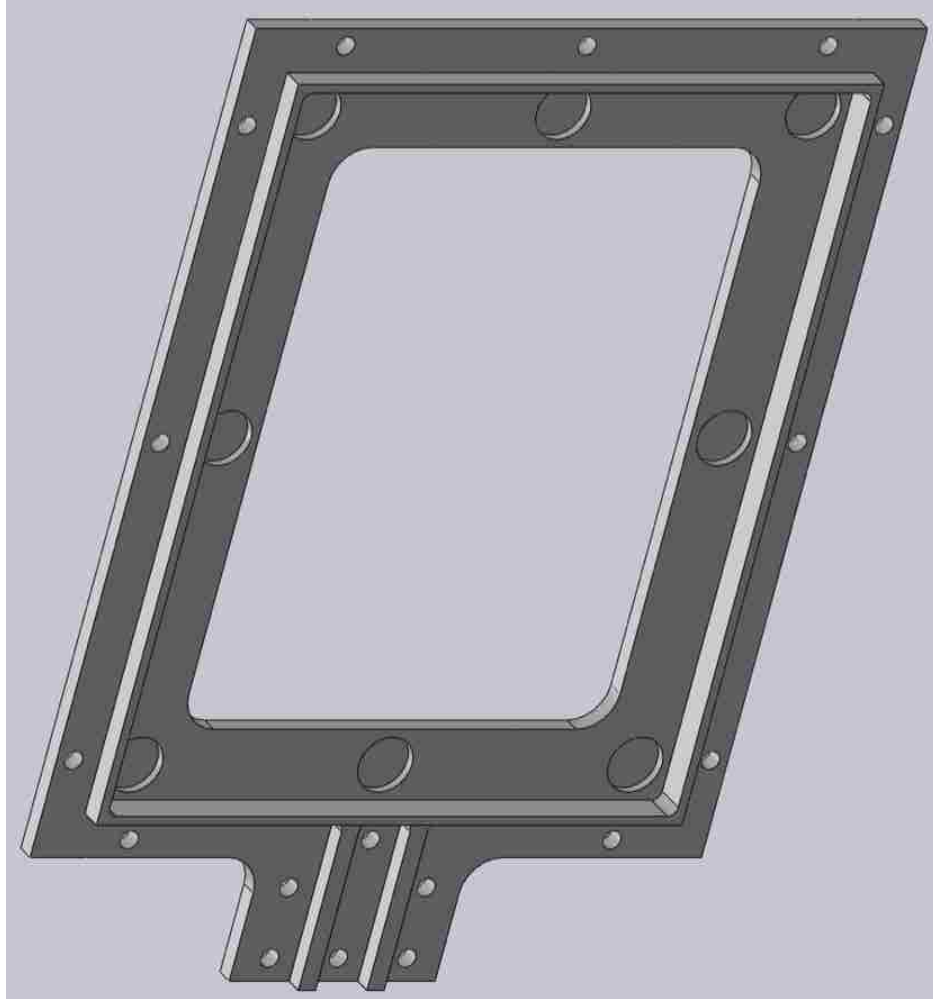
The back of the lightweight mount. This bolts to the front of the lightweight mount to hold mirror in place.
